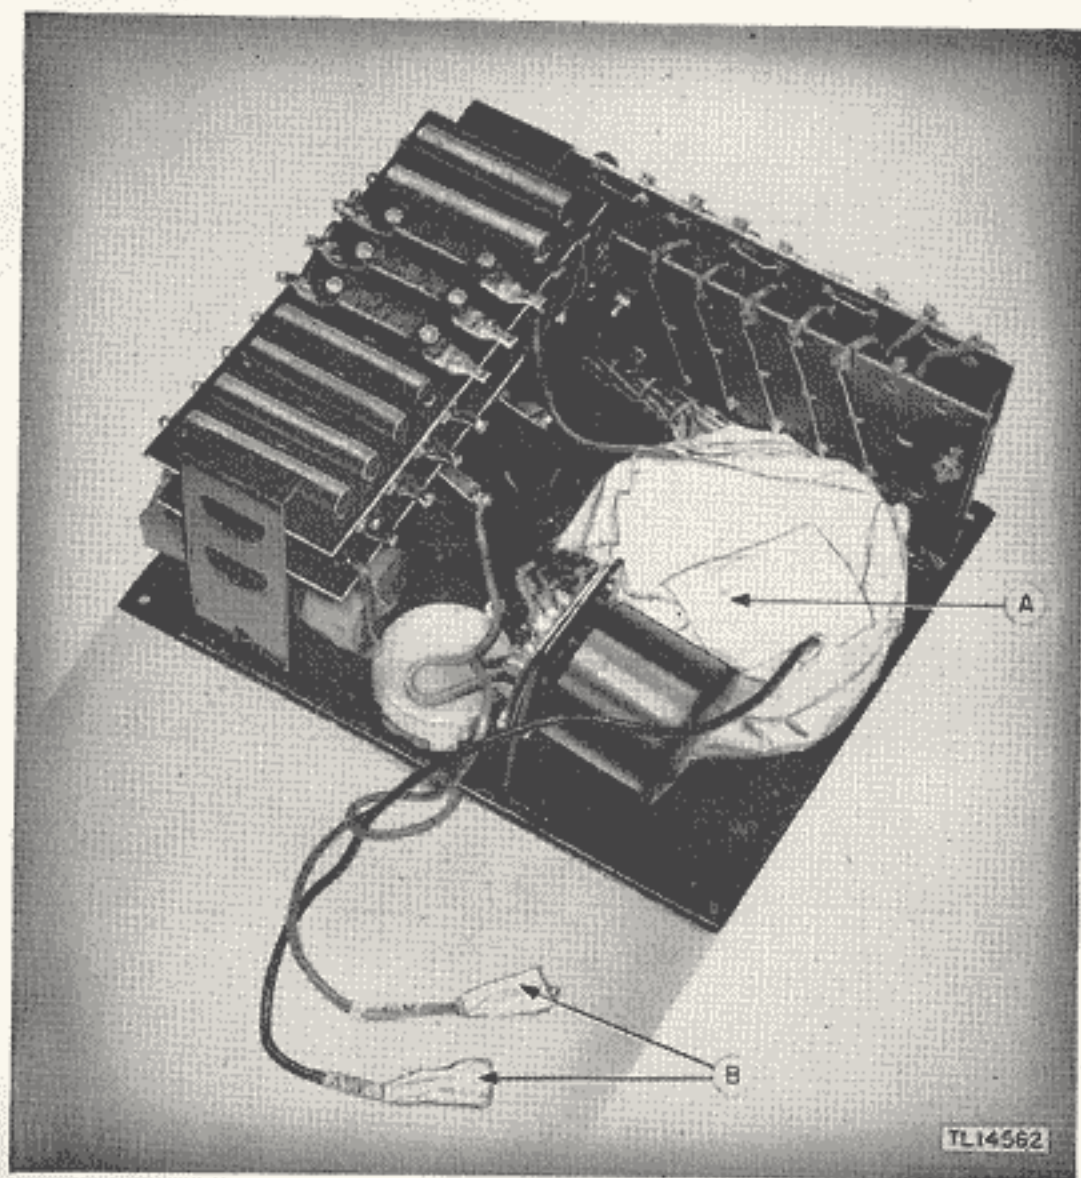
Volt ohmmeter I-166, bottom view, masking.
